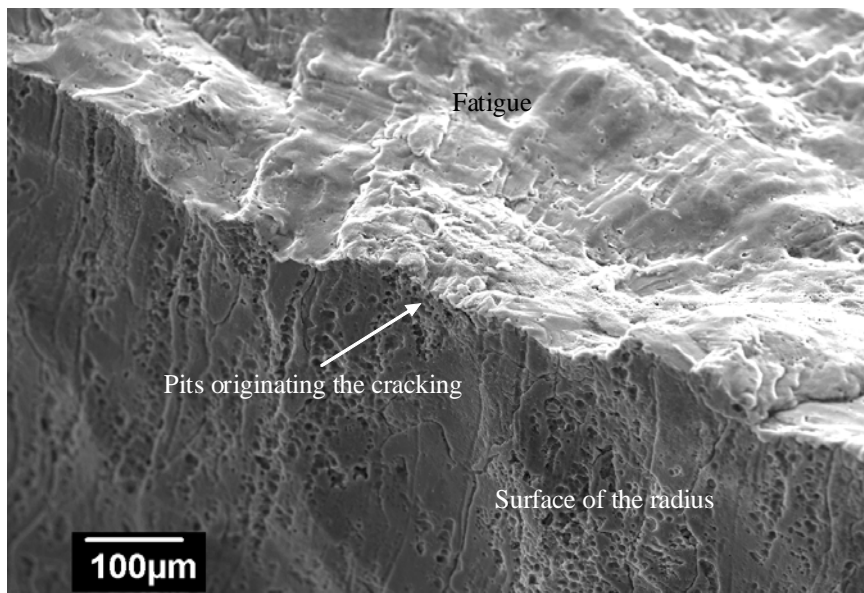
Example of fatigue cracking from small etch pits during the FSFT of an AA2024-T851 wing lower skin. Cracking from the etch pits may have been facilitated by a shallow radius in the skin.
